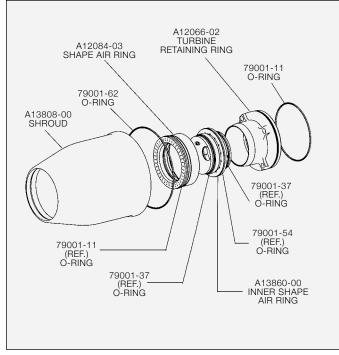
B: A13858-02 Shape Air Kit (Dual-Flex Shape Air) All PTFE Parts
